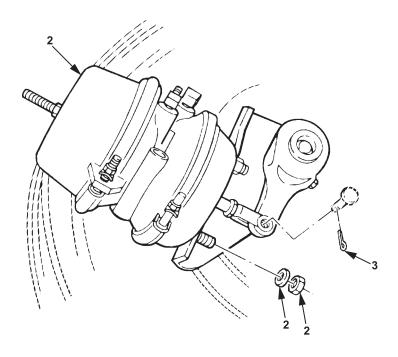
Rear-Rear Axle Spring Brake Chamber.
